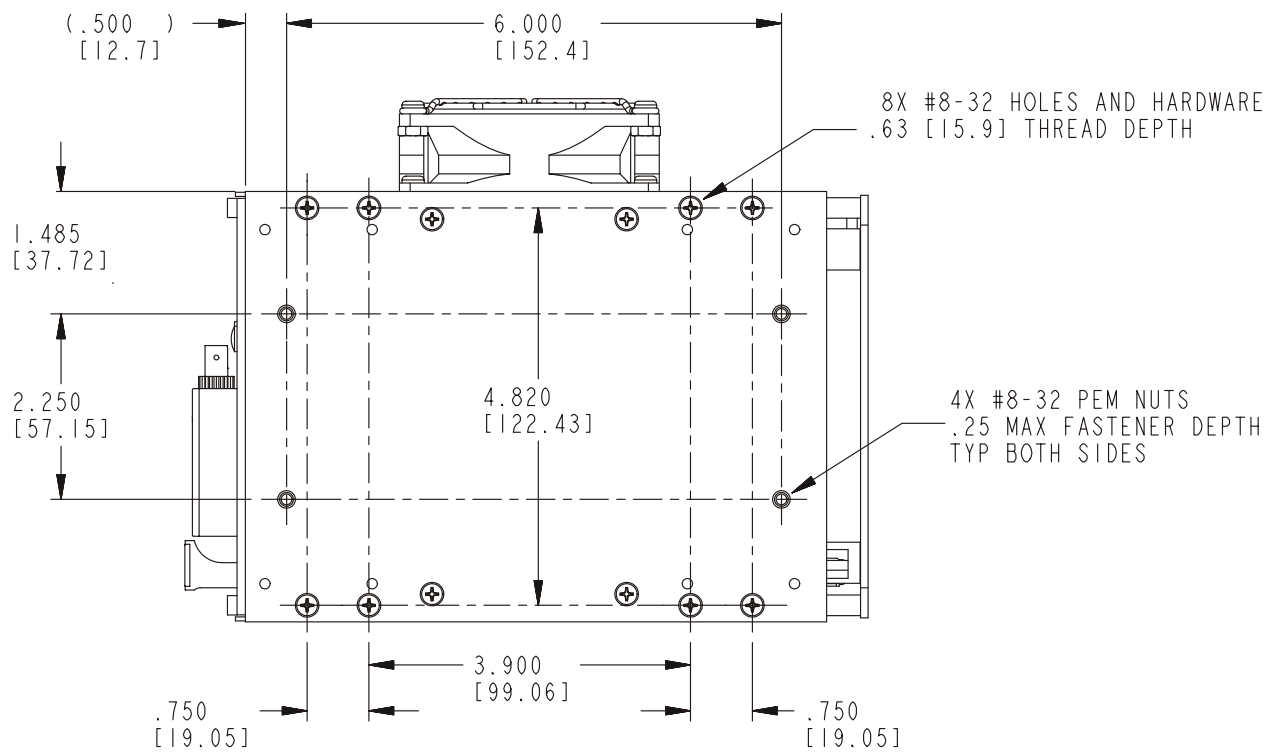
Side View of Model 903 Remote Card Cage
